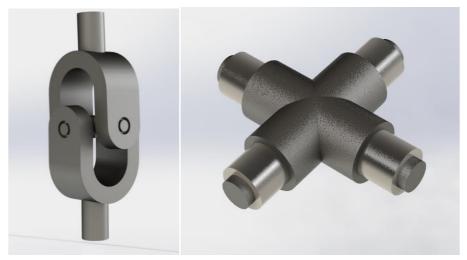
Universal Joint Assembly and Assembly Bushing, Swivel
